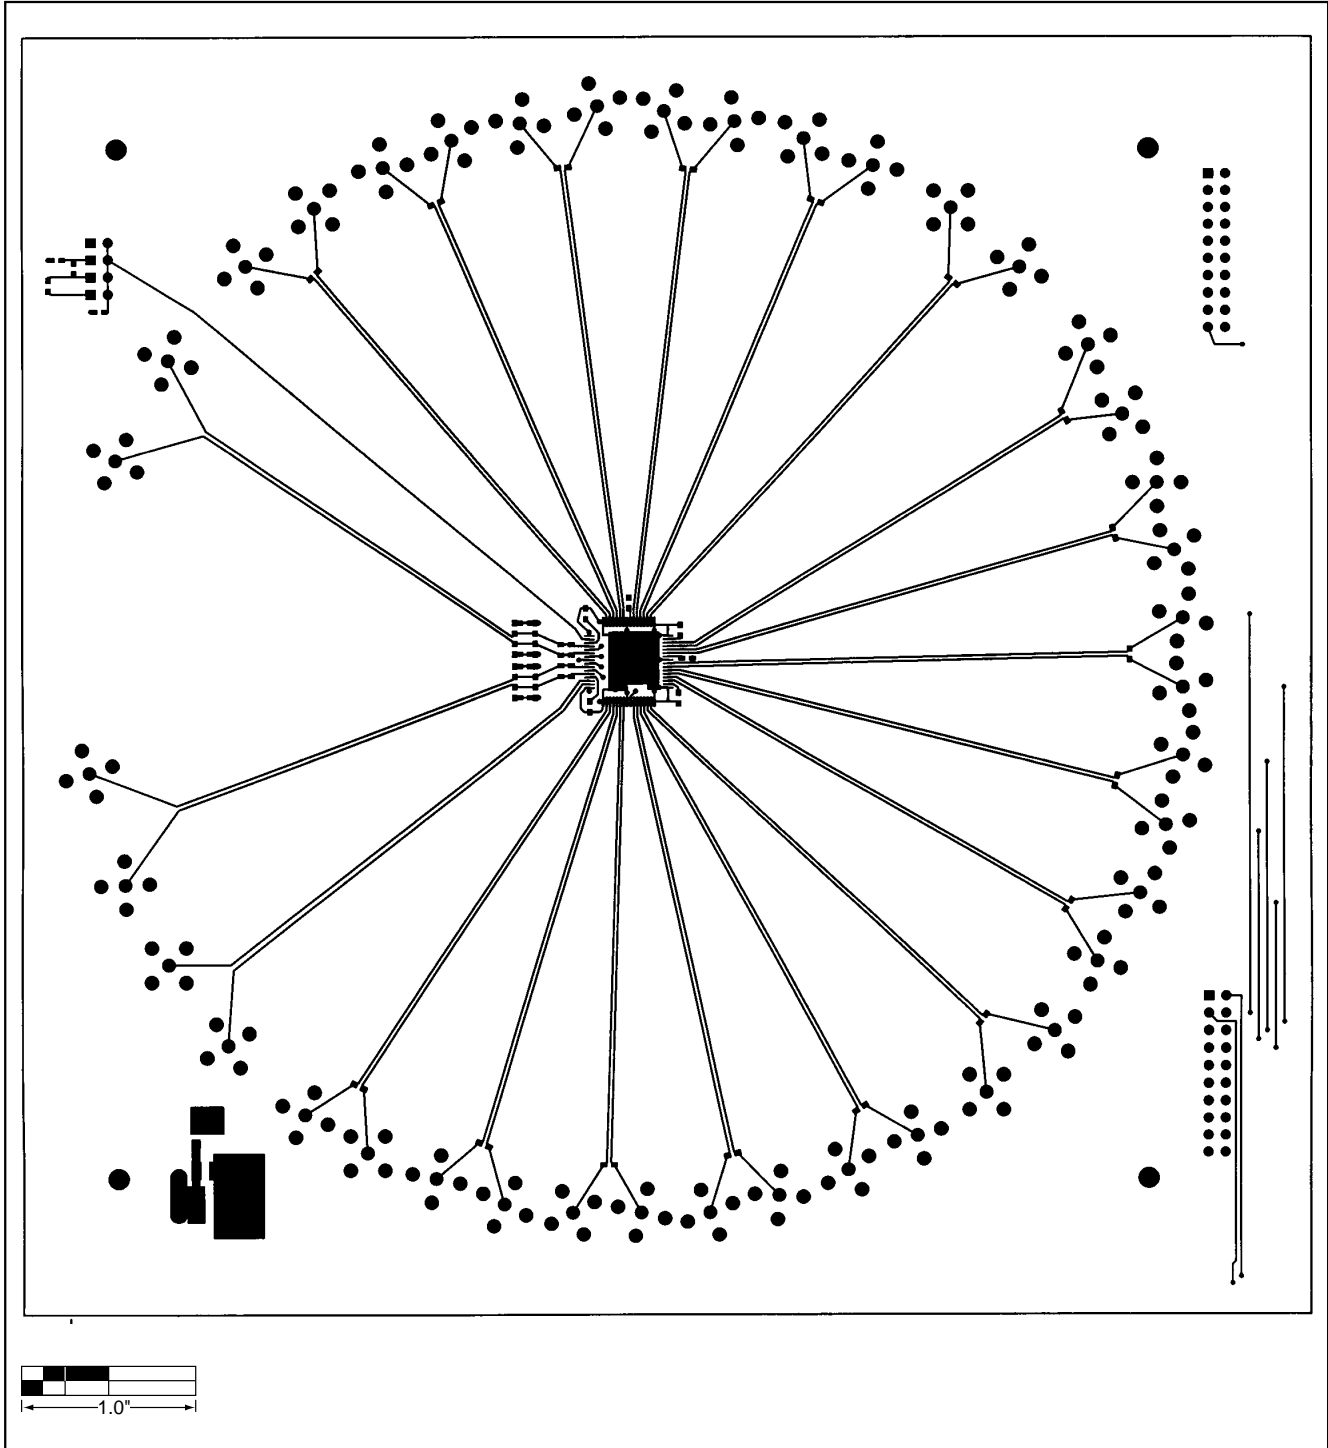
MAX3885 EV Kit PC Board Layout—Component Side
